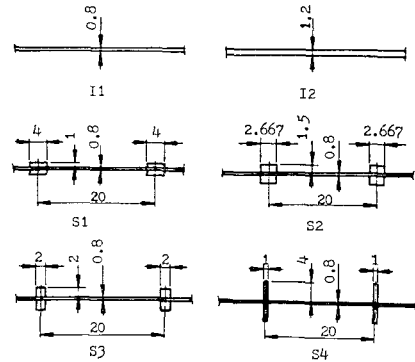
Shapes and dimensions of the specimens for numerical examples
